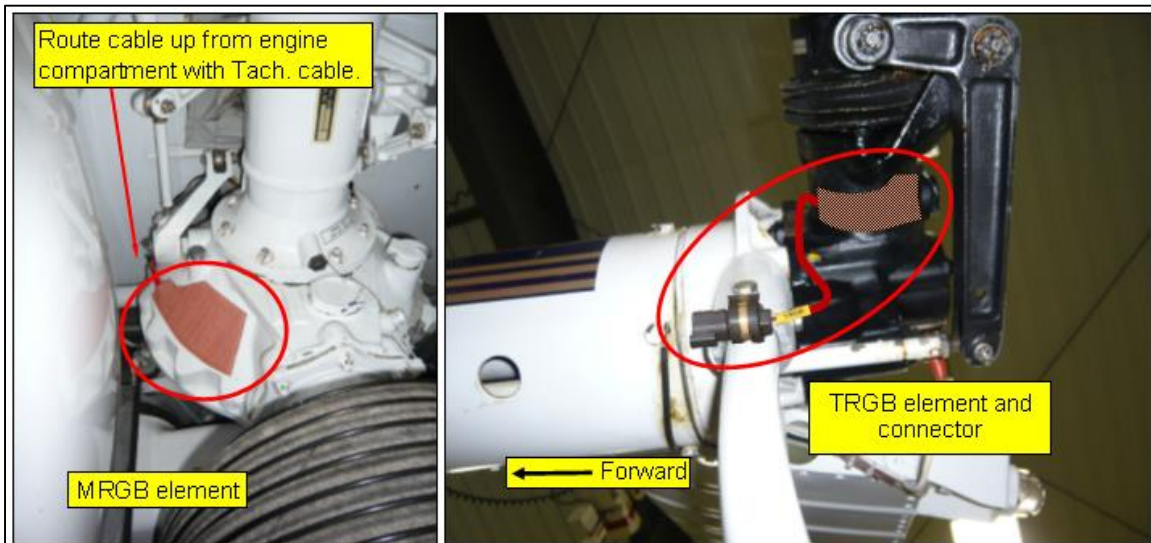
TEP2740- MRGB element locate on open area or conical, lead forward to follow tach cable. TEP2741- TRGB element locate on bottom lead forward, hard mount connector clear of control arm with clamp for connection with jumper cable.
